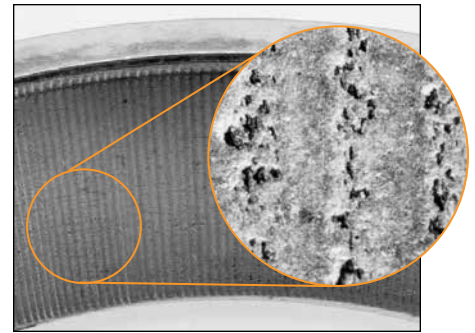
Magnified 10X, this fluting, defined as a series of small axial burns, was caused by an electric current passing through the bearing while it was rotating.
